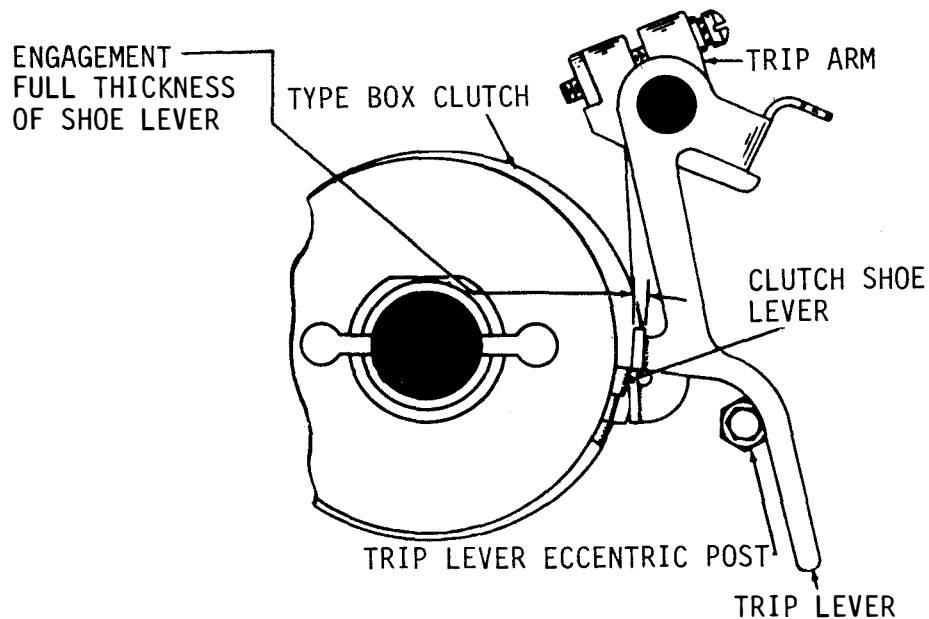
Type Box Clutch Trip Lever Eccentric Post, Right Side View
